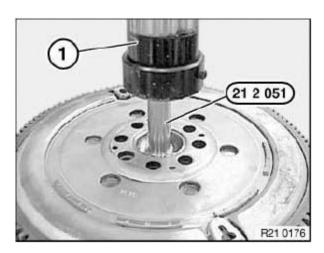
Identifying Special Tool (21 2 051) And Hydraulic Press Courtesy of BMW OF NORTH AMERICA, INC.
